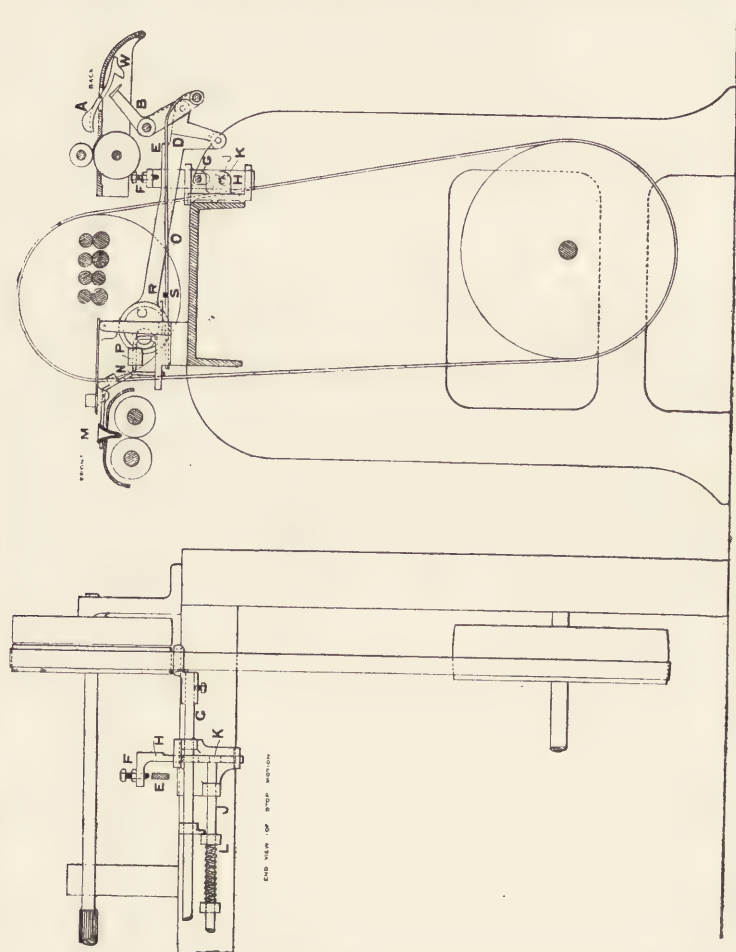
SECTIONAL END VIEW OF A DRAWING FRAME WITH FRONT AND BACK STOP MOTIONS.
